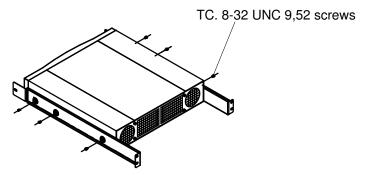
Fixing the side attachment brackets to the Fibre Channel switch
